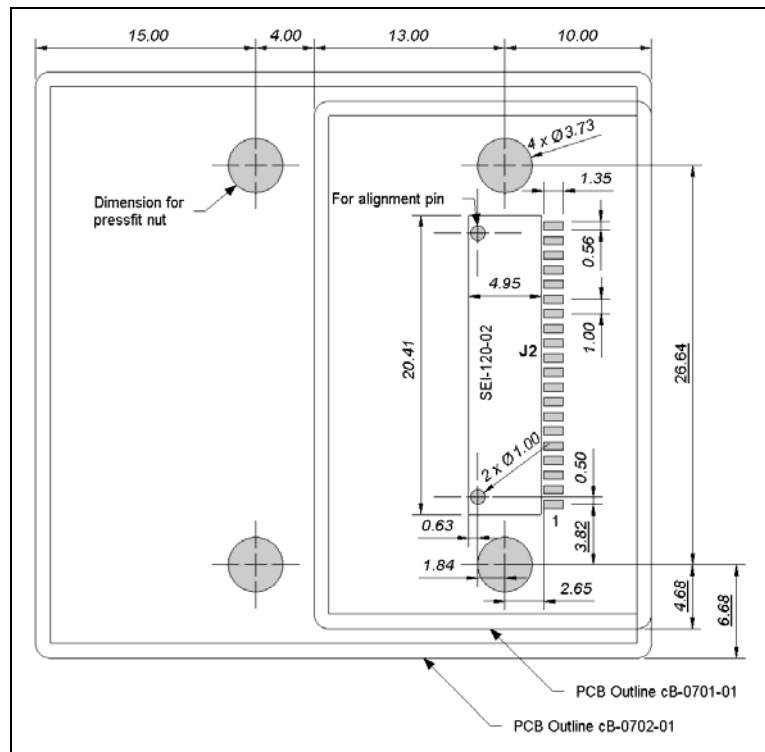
Host PCB layout [mm] for SEI-120-02-GF-S.
